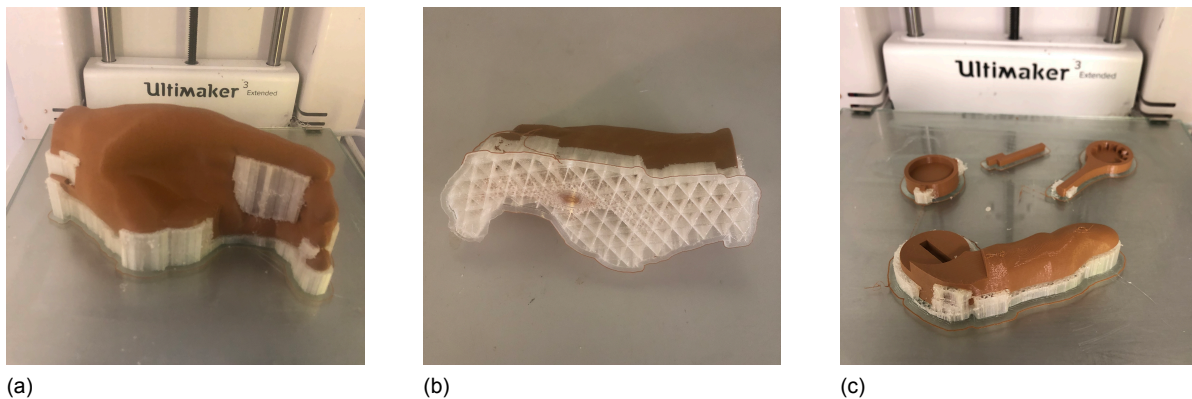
The parts of the prototype after printing. Soluble support (white in the pictures) has been used and the palm and parts have been printed separately. a) shows the palm after printing, b) the support structure of the palm and, c) the printed thumb, lever, top and pin.
